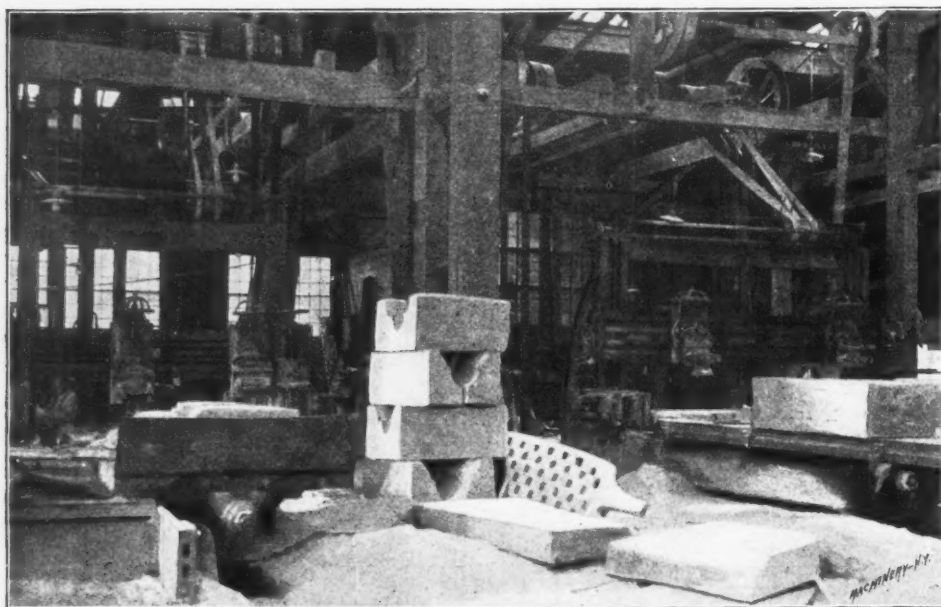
PLANERS IN A STONE WORKING SHOP.
